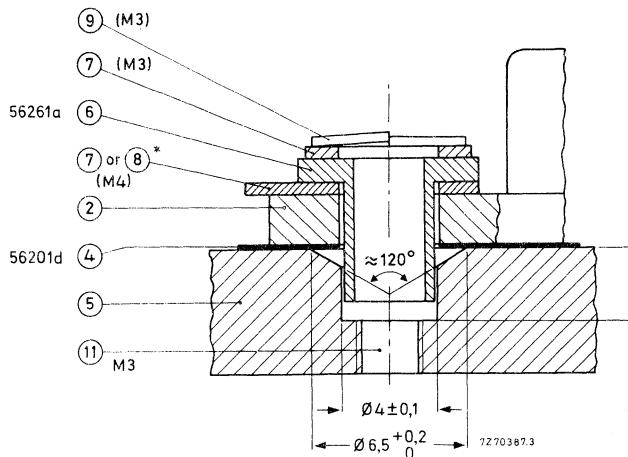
Insulated mounting (500 V) with tapped holes or insert nuts.
